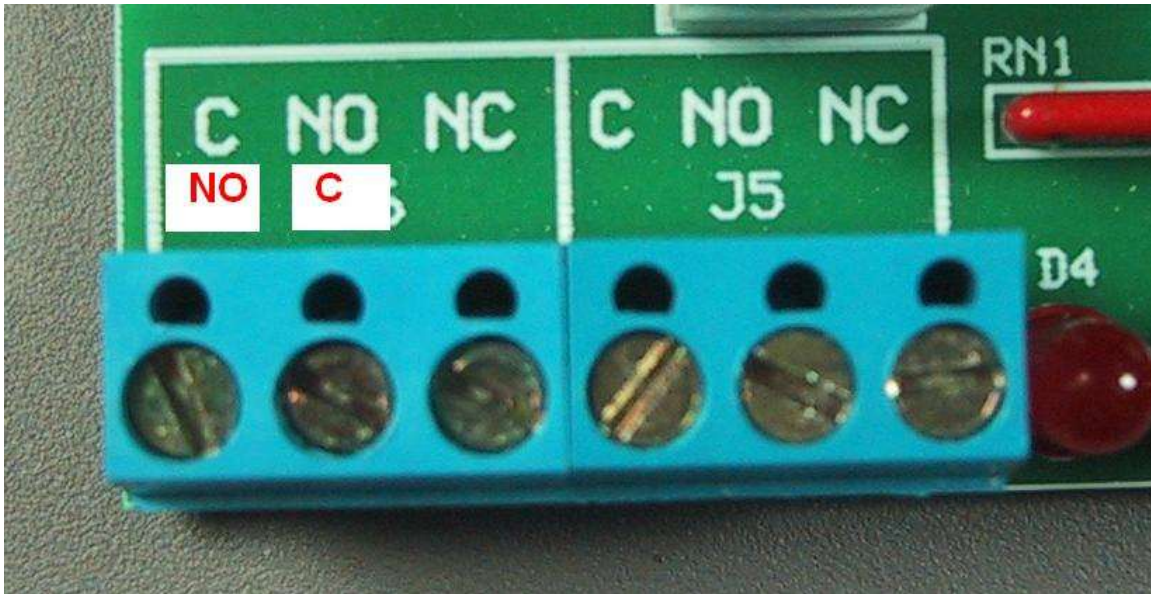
Corrected Relay Contacts (Version C PCB ONLY)
